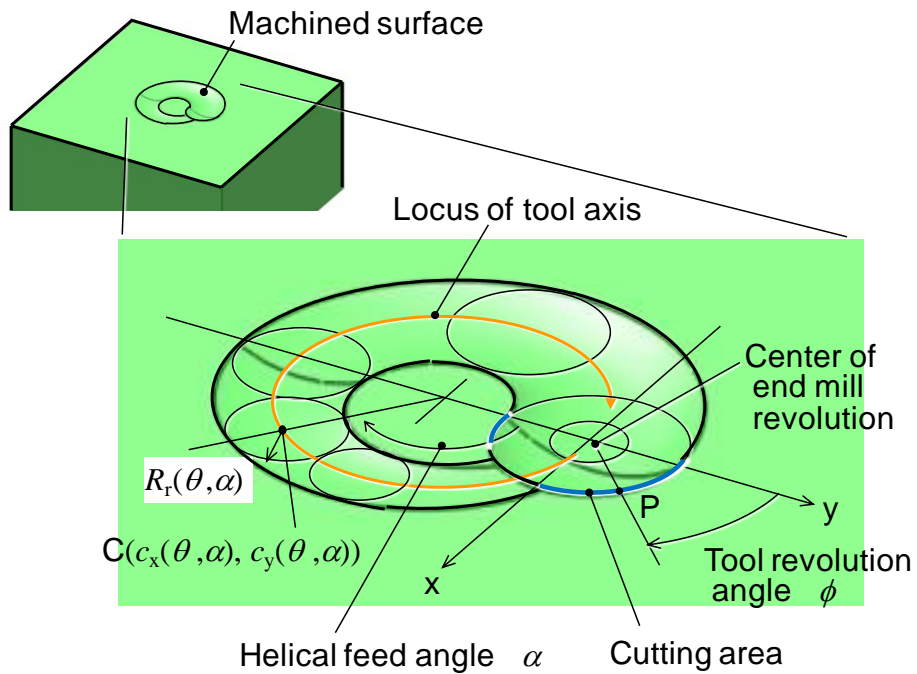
7 Cutting area in helical milling with a ball end mill.
